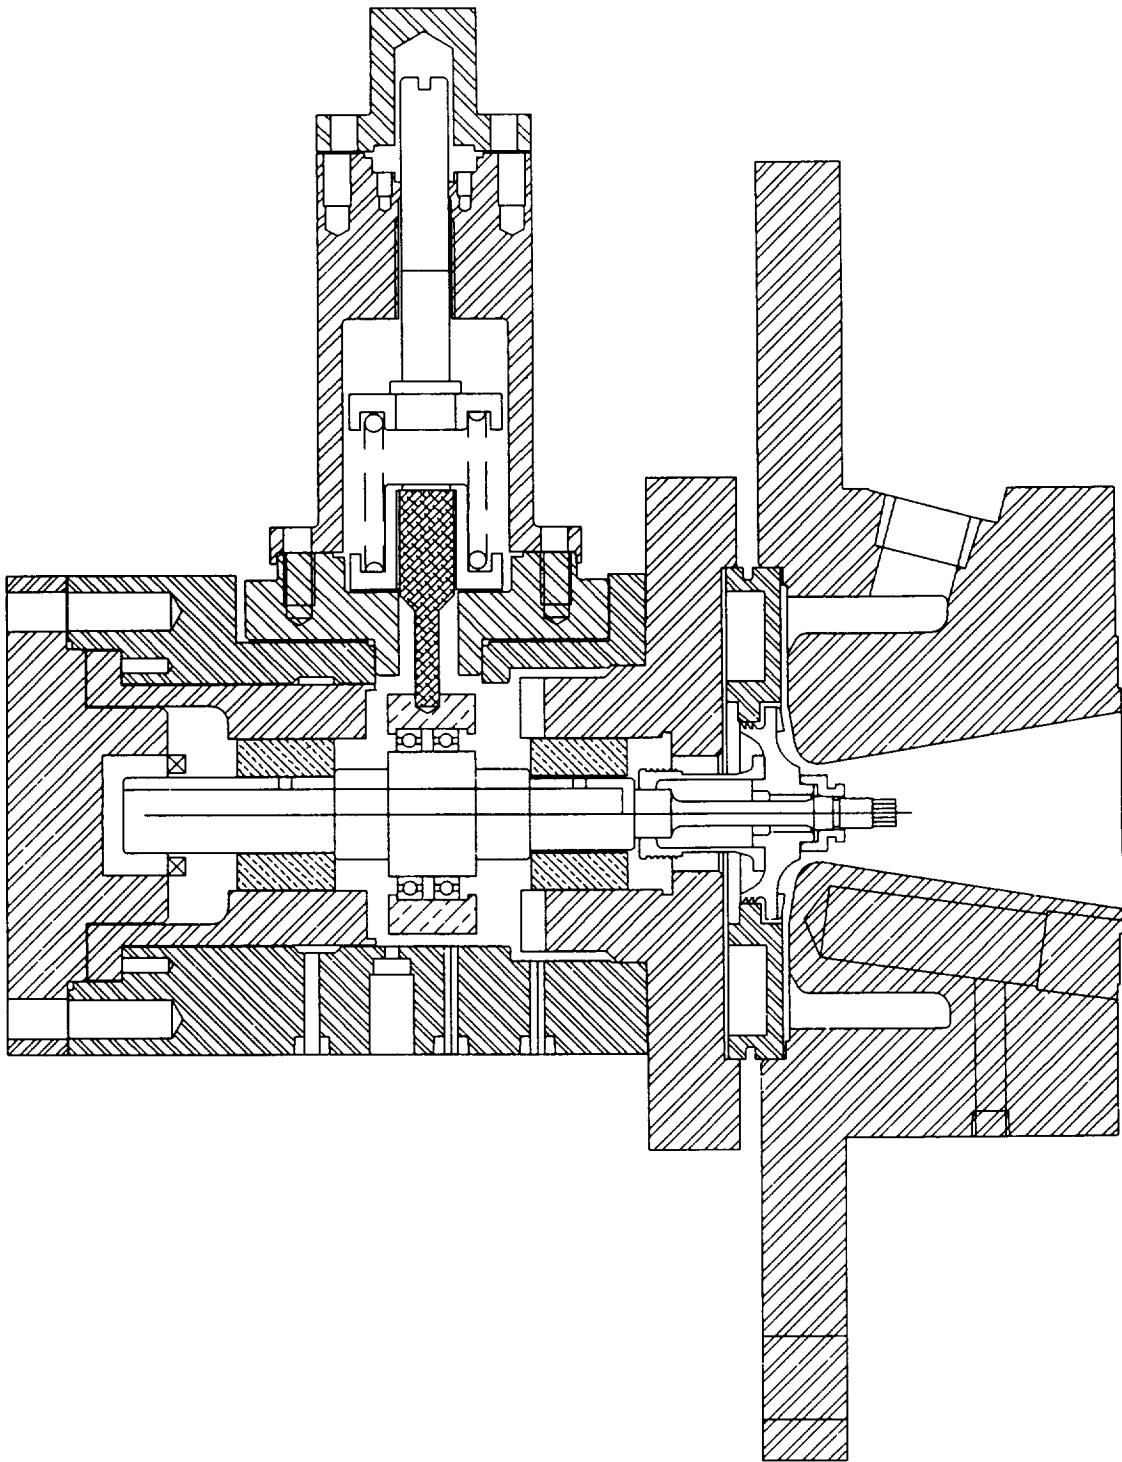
Hybrid Bearing Tester configured with rolling element bearing loader
